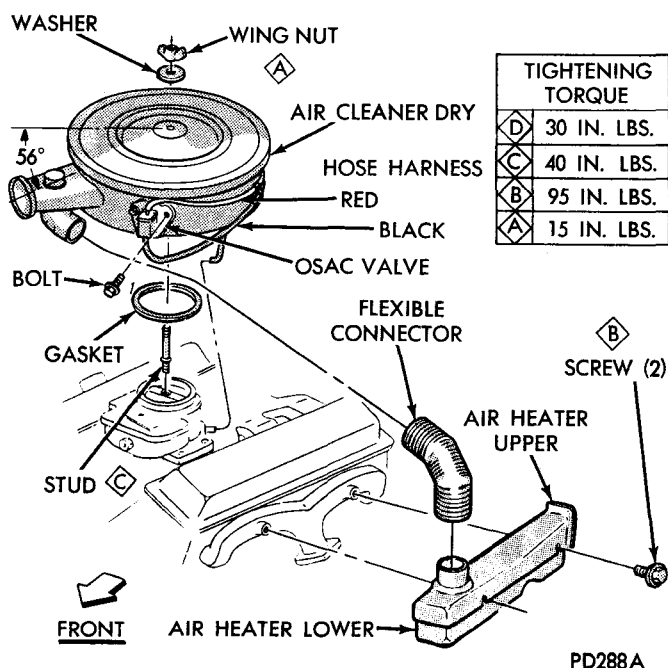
Carburetor Air Heater and Air Cleaner 361 and 413 Cubic Inch Engines
